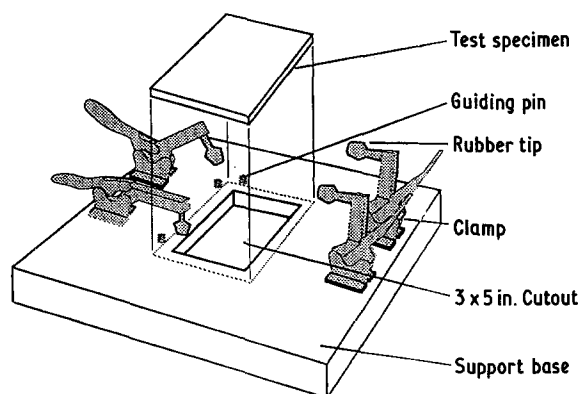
Impact test fixture. Size of cut out 3 in. (76 mm)  $\times$  5 in. (127 mm).
